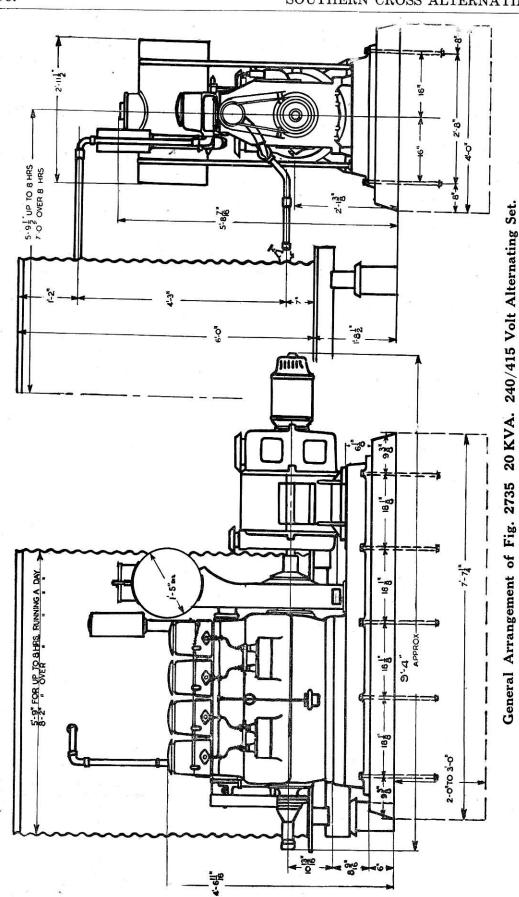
20KVA 240/415 Volt Alternating Set. FOUNDATION.
